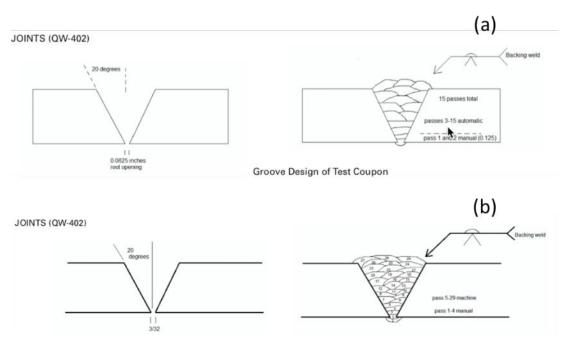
Groove design and weld-pass layout of the code qualification welding experiment: (a) for 20mm thick plate (W1 weld); (b) for 28.6mm plate (W2 and W4 welds).
